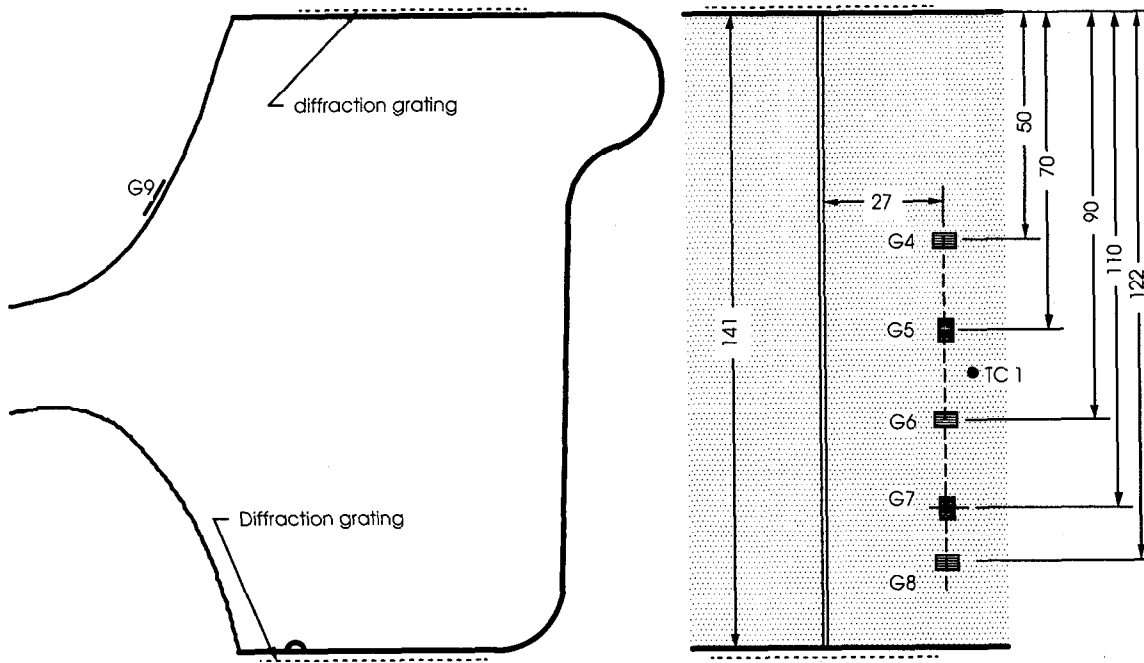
Location of Strain Gages, Thermocouples, and Gratings around the Cut (Dimensions in Millimeters)
